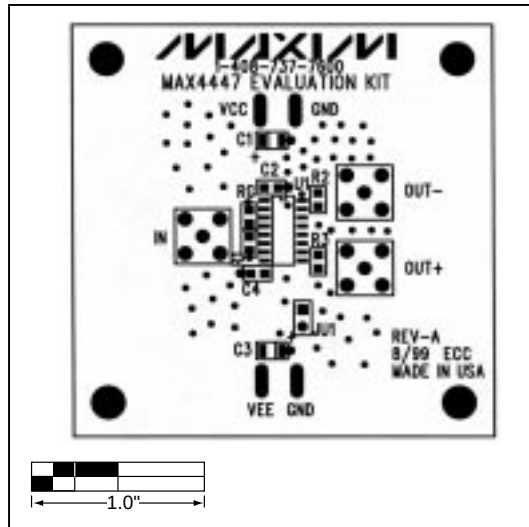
MAX4447 EV Kit Component Placement Guide—Component Side
